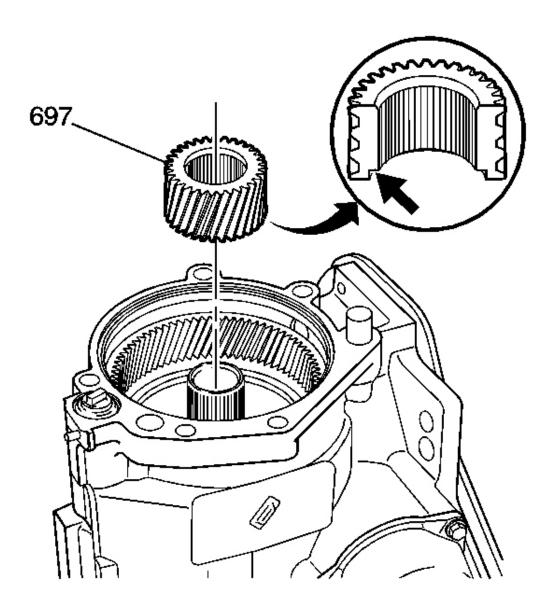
Identifying Final Drive Sun Gear Courtesy of GENERAL MOTORS CORP.
